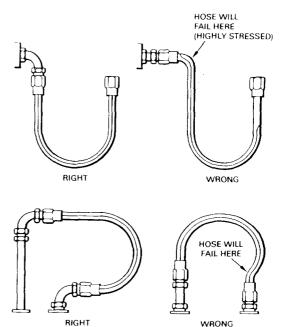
RIGHT AND WRONG METHOD OF HOSE INSTALLATION—PRESSURE APPLIED TO HIGHLY STRESSED HOSE WILL CAUSE PREMATURE FAILURE
